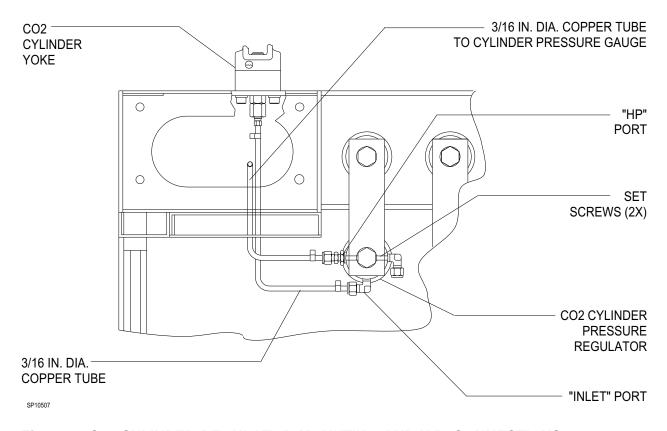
CO₂ CYLINDER REGULATOR MOUNTING AND H.P. CONNECTIONS
